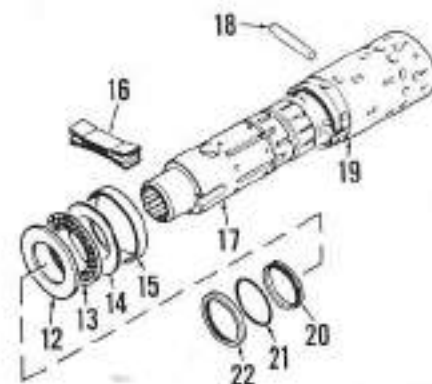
Exploded view of steering valve spool, sleeve, bearings and seals.
